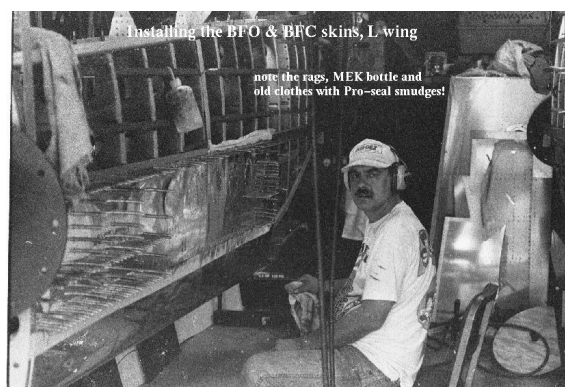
Riveting the bottom skins on the left auxiliary tank.
